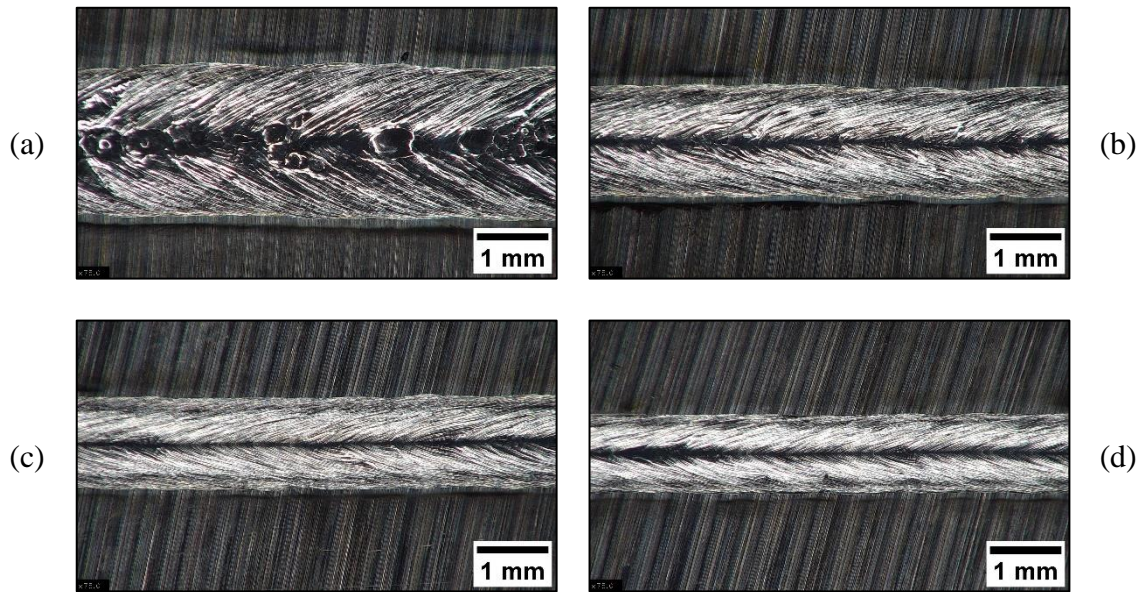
Figure F.6 show photographs of the weld surfaces at respective powers of 800 W, 1000 W, 1200 W, 1600 W, 2000 W, and 2400 W for Ti-6Al-4V. Four travel speeds at each power are represented. Figure F.7-Figure F.12 show photographs of the weld ends that were used to approximate the weld pool geometries. These were produced by maintaining the beam travel velocity and instantly extinguishing the laser beam.
